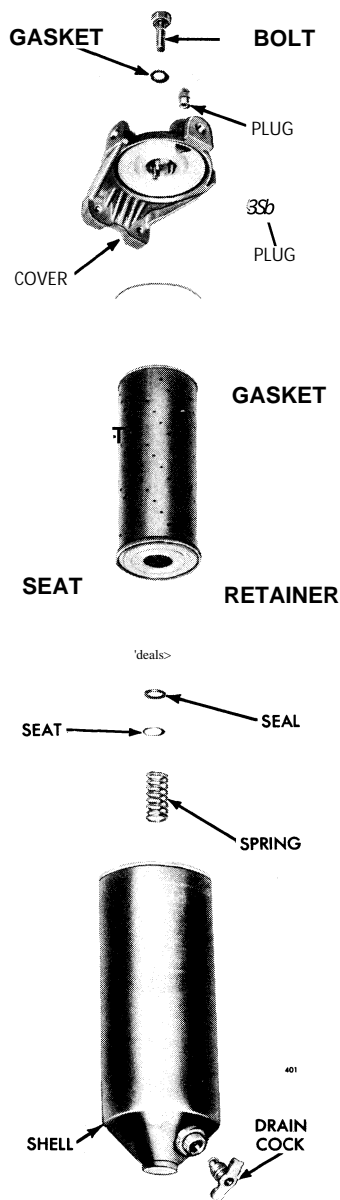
Fuel Filter Details and Relative Location of Parts
